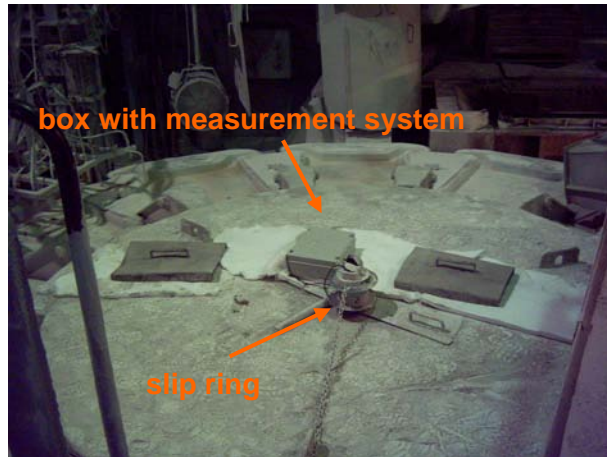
Measurement setup on the casting wheel at Montanwerke Brixlegg AG
